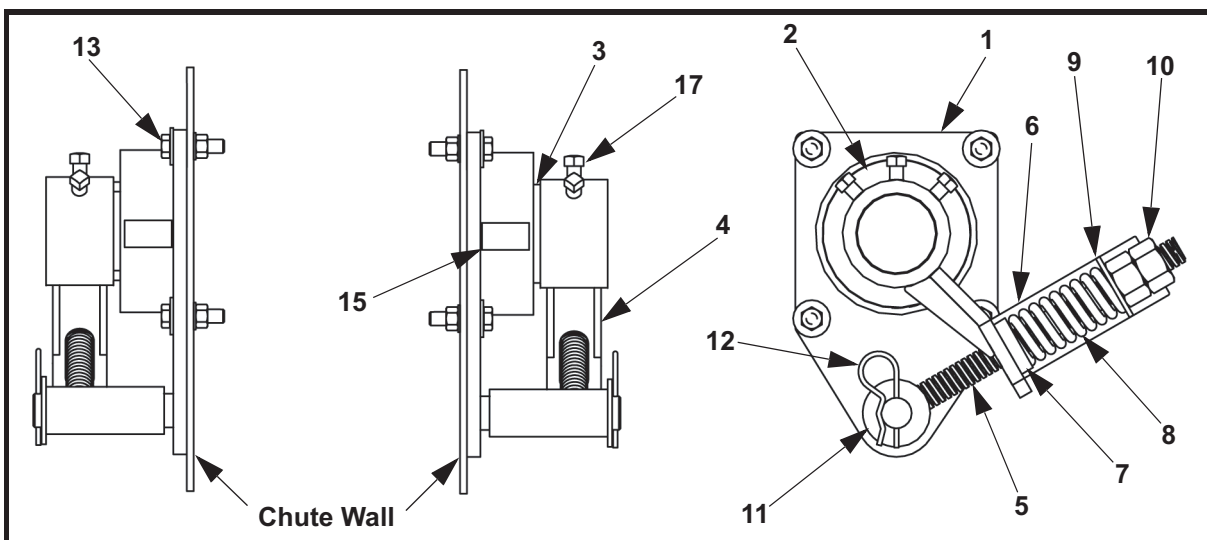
Dual Martin® Universal Spring Tensioner Assemblies, P/N 38003-2-X
